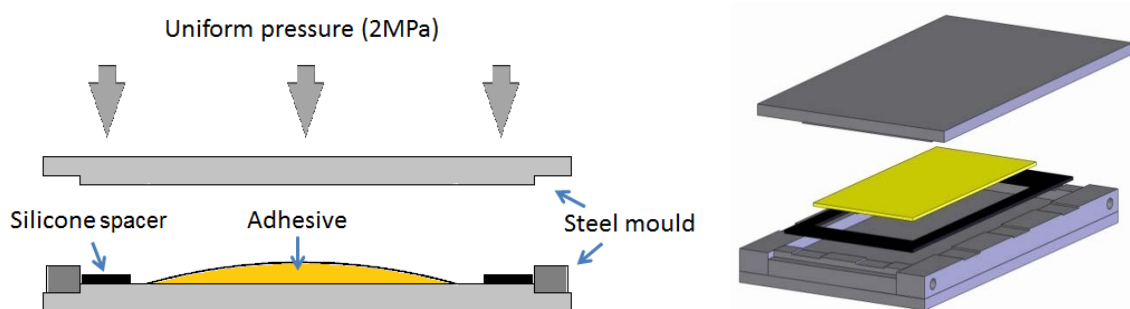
Representation of the technique used to manufacture bulk specimens: a) schematic and b) exploded view of the mould.
